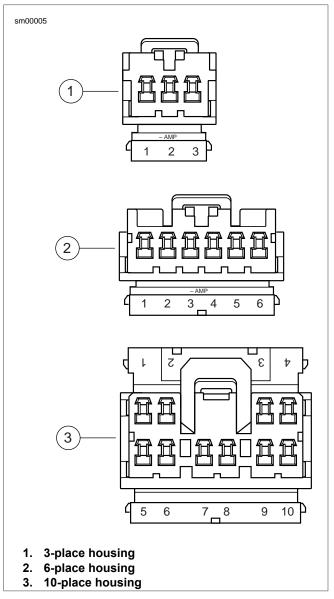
Tyco 070 Multilock Unsealed Connector: Cavity Numbers on Secondary Locks (socket housings shown)
